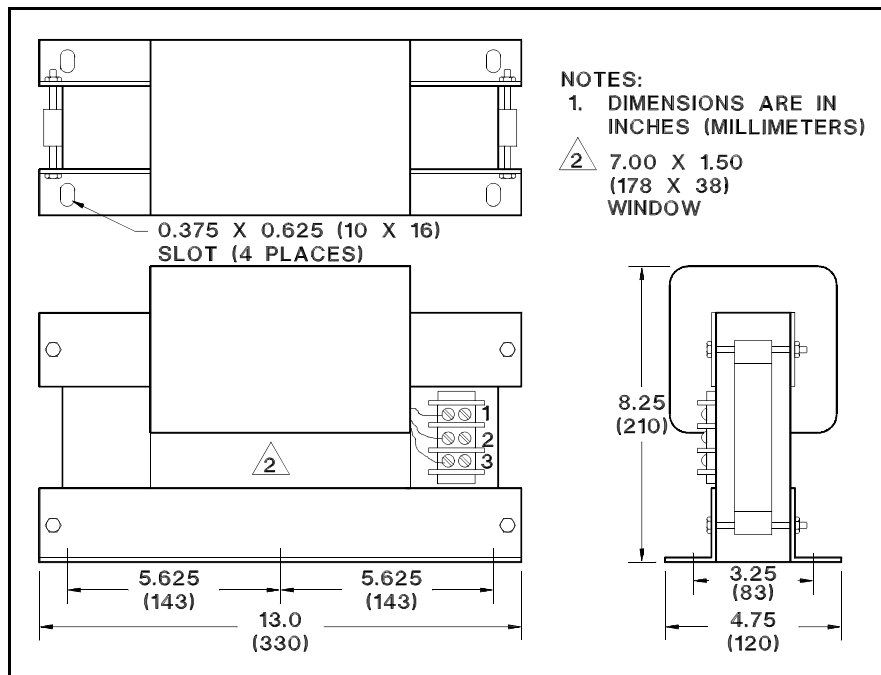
Outline Drawing - Current Transformer BE21432-001
